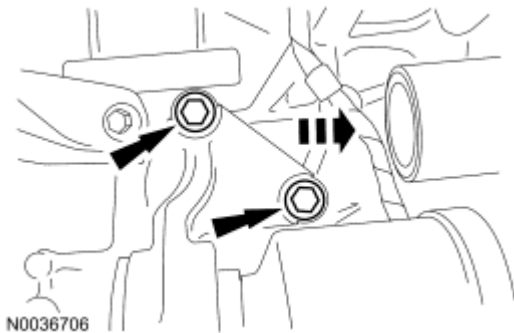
Locating Half Shaft Carrier Bracket Bolts And Sliding RH Halfshaft Out Of Transaxle
